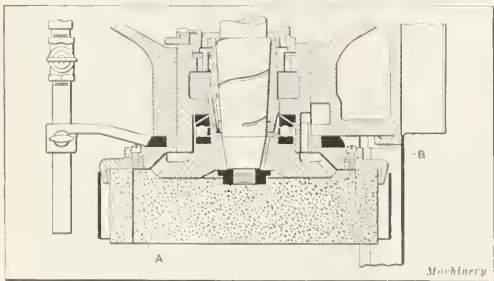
Section showing how Cylinder Wheel of Blanchard Vertical Surface Grinder is held and mounted
